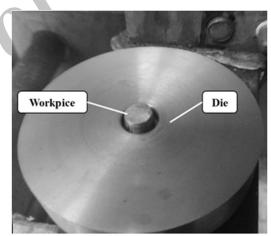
Initial workpiece in the forging die شكل10 قطعه اوليه درون قالب شكل دهي
